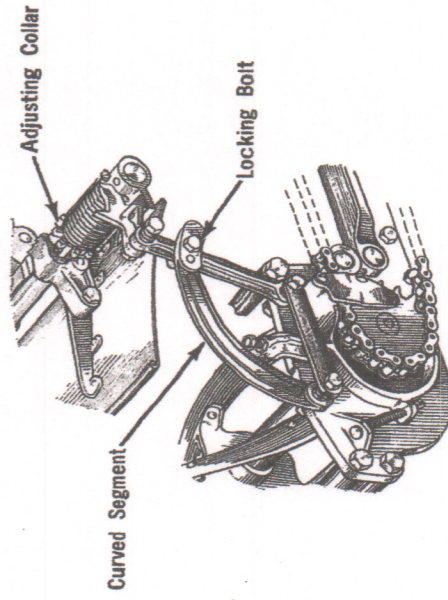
Counterbalancing Adjustment for Front Cutting Unit.
